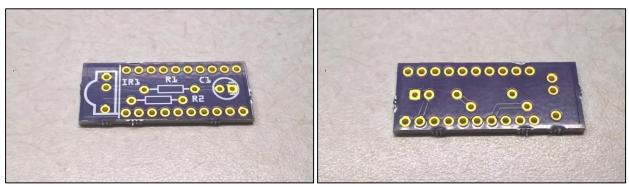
Part 4c, IR add-on PCB, Top View and Bottom View
